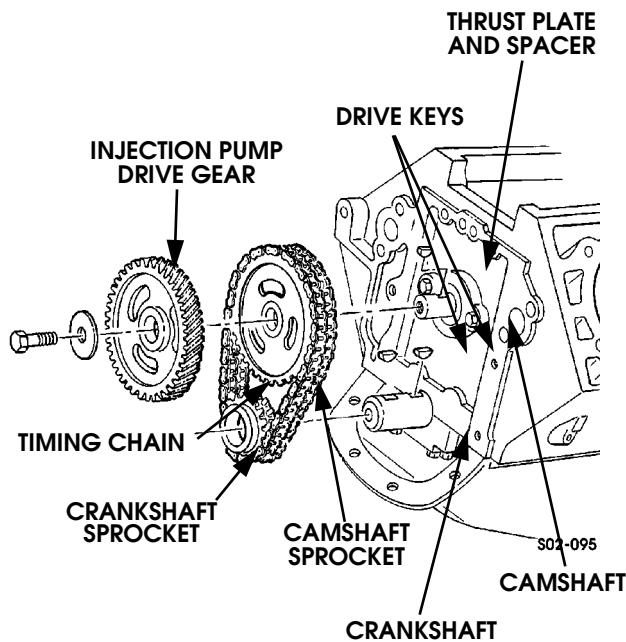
Timing Chain, Sprockets, and Drive Gear Installation
